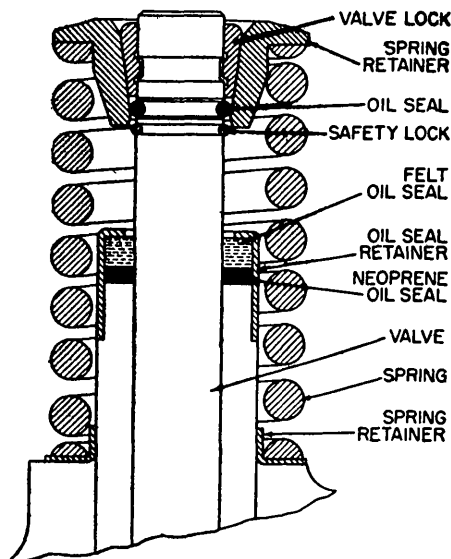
A Valve stem oil seals on 1951-52 Ambassador
